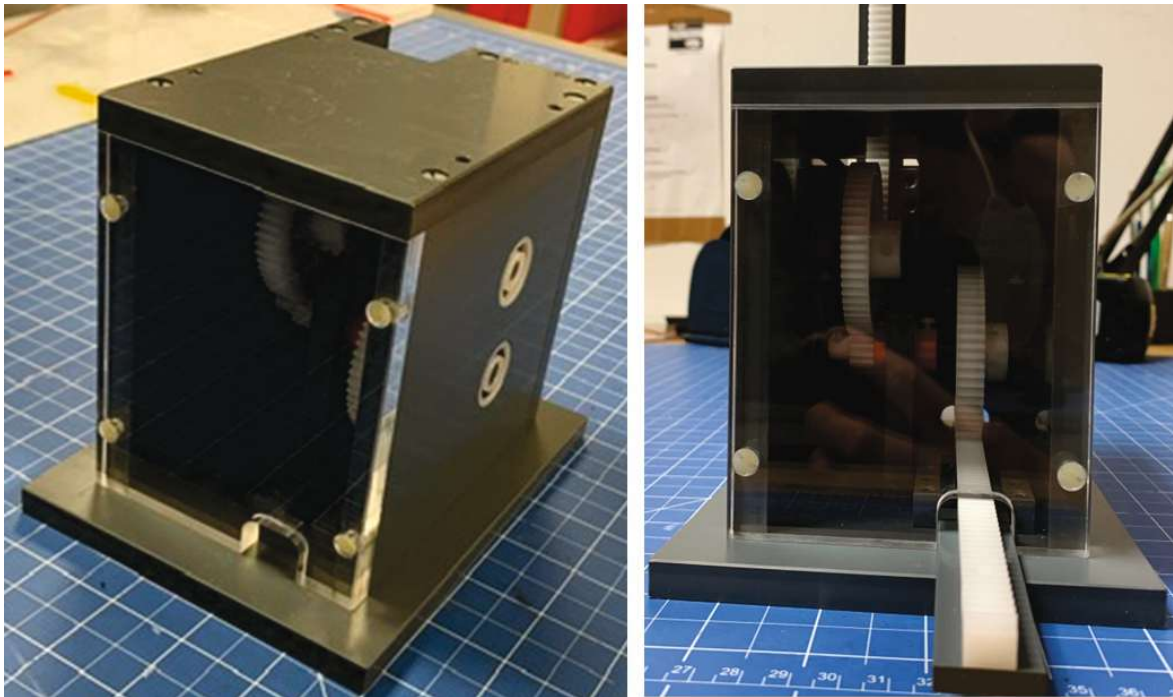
Photograph of the build Gear Box. Isometric view on the left and front view on the right. The Gear Box is placed on a cm grid for scale.
